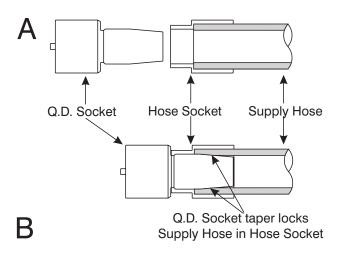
Thread Tapered End of Q.D. Socket into Hose Socket.
